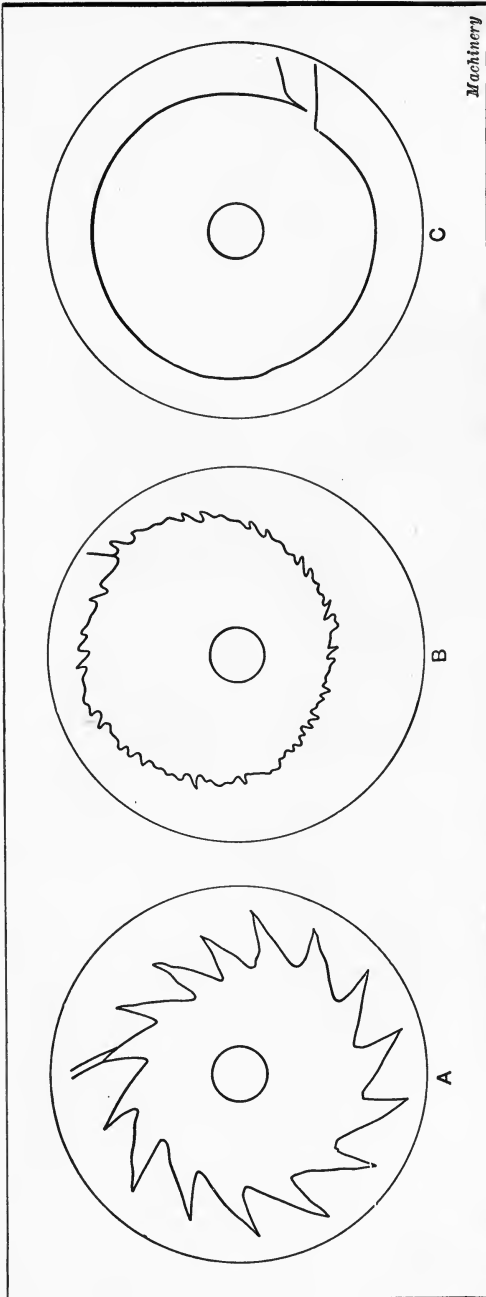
(A) Chart obtained on Machine illustrated in Fig. 31 from Two Gears cut with Form Milling Cutters. (B) Chart obtained from Two Gears cut on a Gear-generating Machine with a Straight-sided Rack Cutter. (C) Chart secured from Two Gears hardened and then ground in a Grinding Machine of the Molding-generating Type
